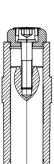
Gear unit mounted to shaft with a shoulder using the fastening element
